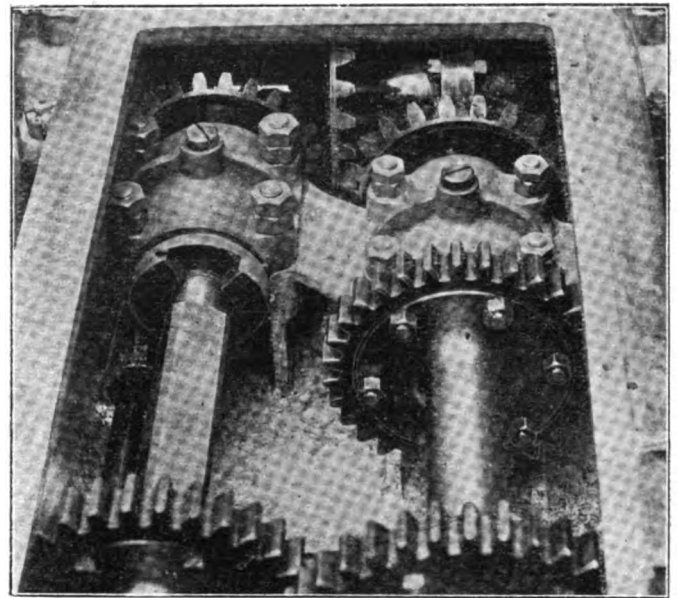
View of Change-Speed Gear Box on "Crossley" Car.
